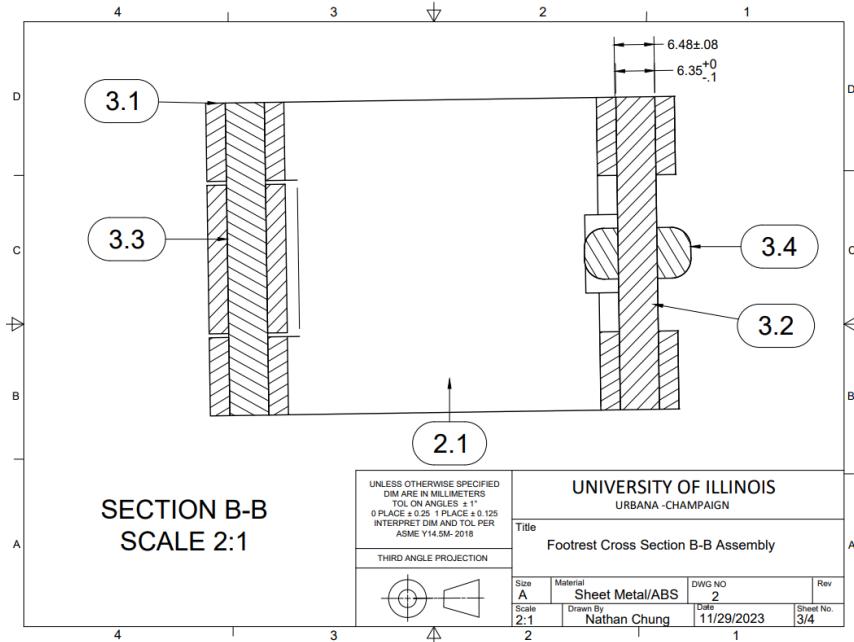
Cross-Section Clamp View with Pin and Hole Dimensions
